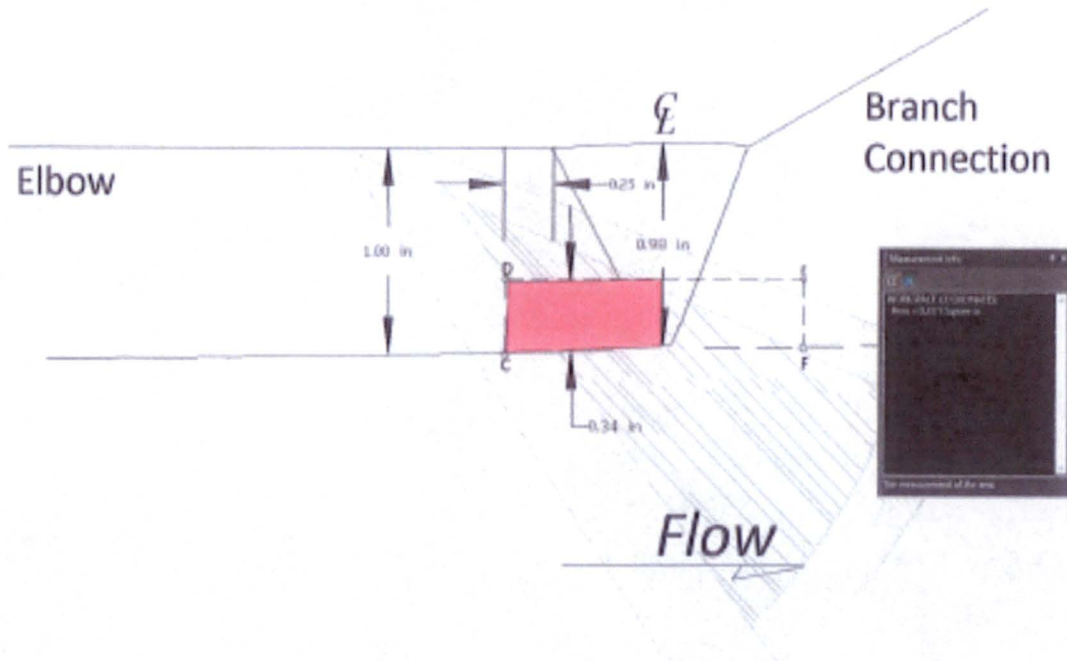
Weld 1-SI-29-26F (Extracted from Reference DRAWING A-53)
